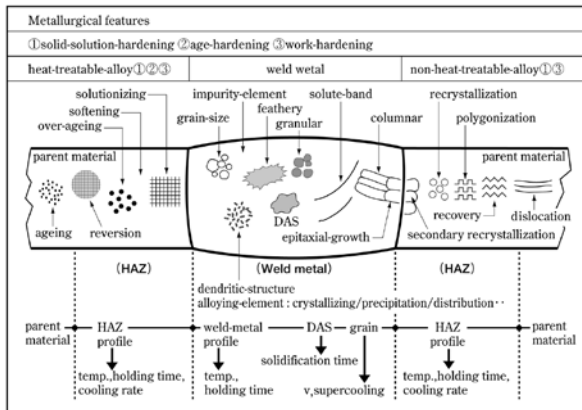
Cause and effect diagram on arc welding joints.
